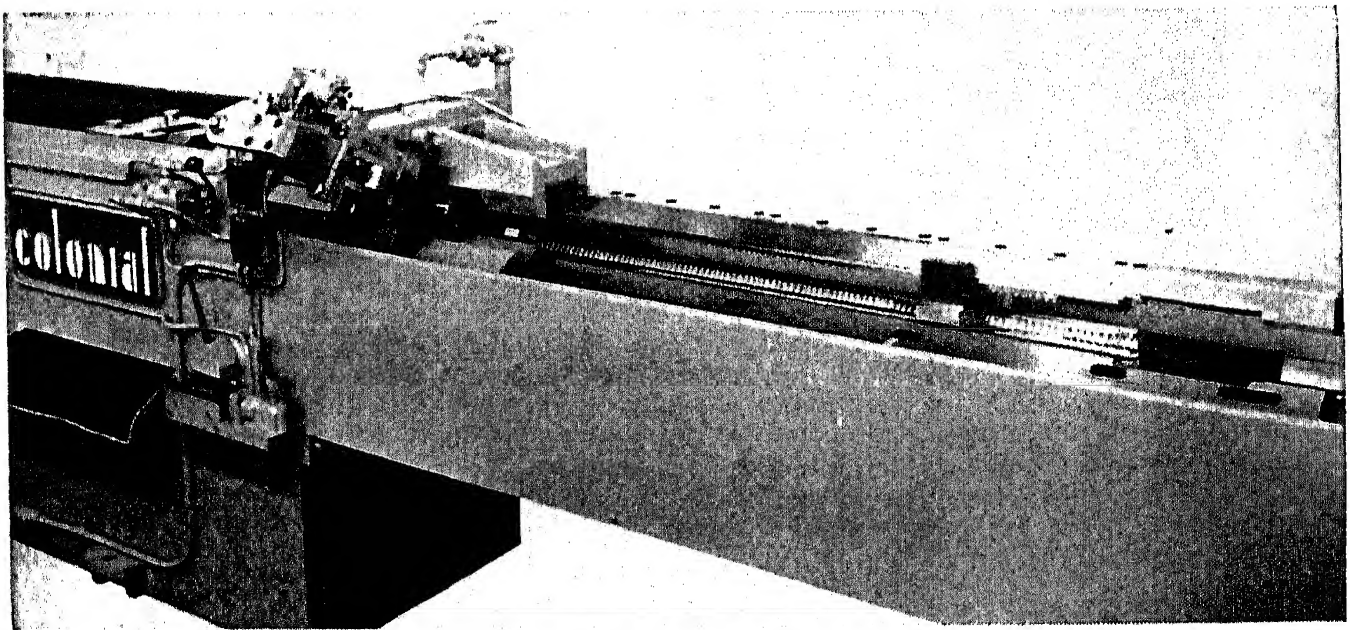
A horizontal pull type broaching machine set up for broaching three flats on the outside of a disc. (Courtesy Colonial Broach Co.)
